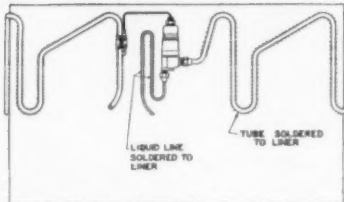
New method of soldering tubing to the liner of a bottle cooler.
